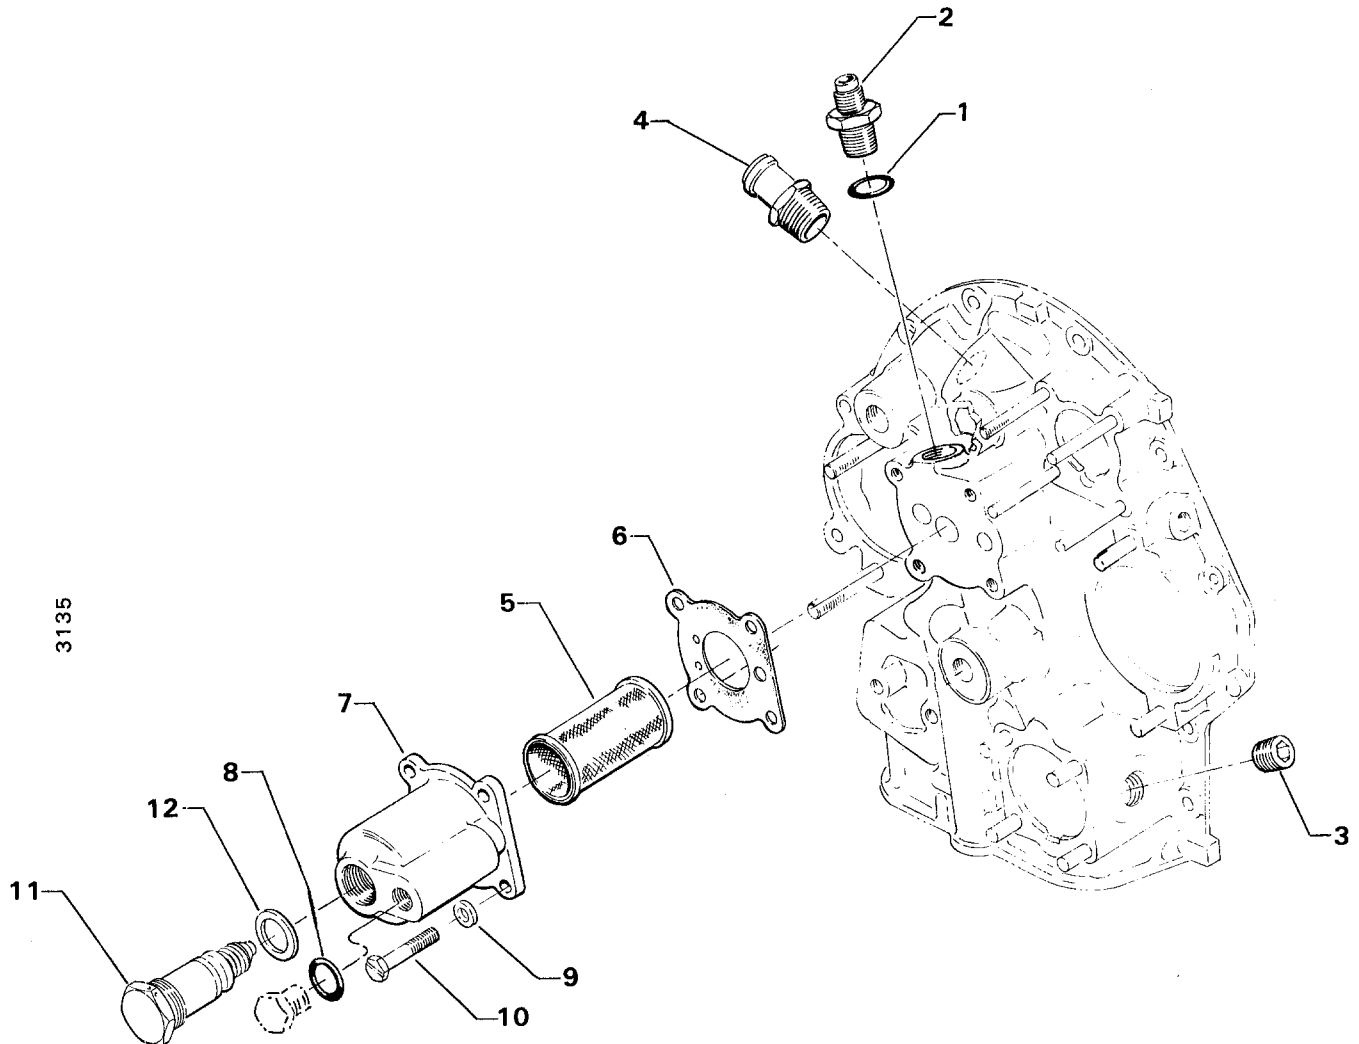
OIL PRESSURE SCREEN AND OIL COOLER BYPASS VALVE
